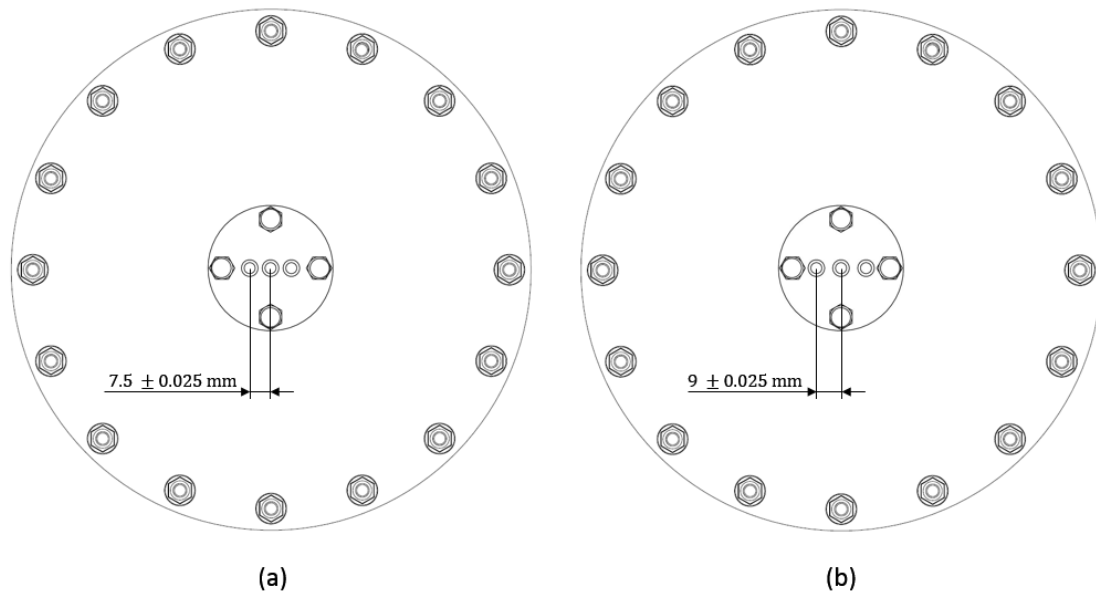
Schematic of the endcaps used to join the multi-tube test section to the calming section
